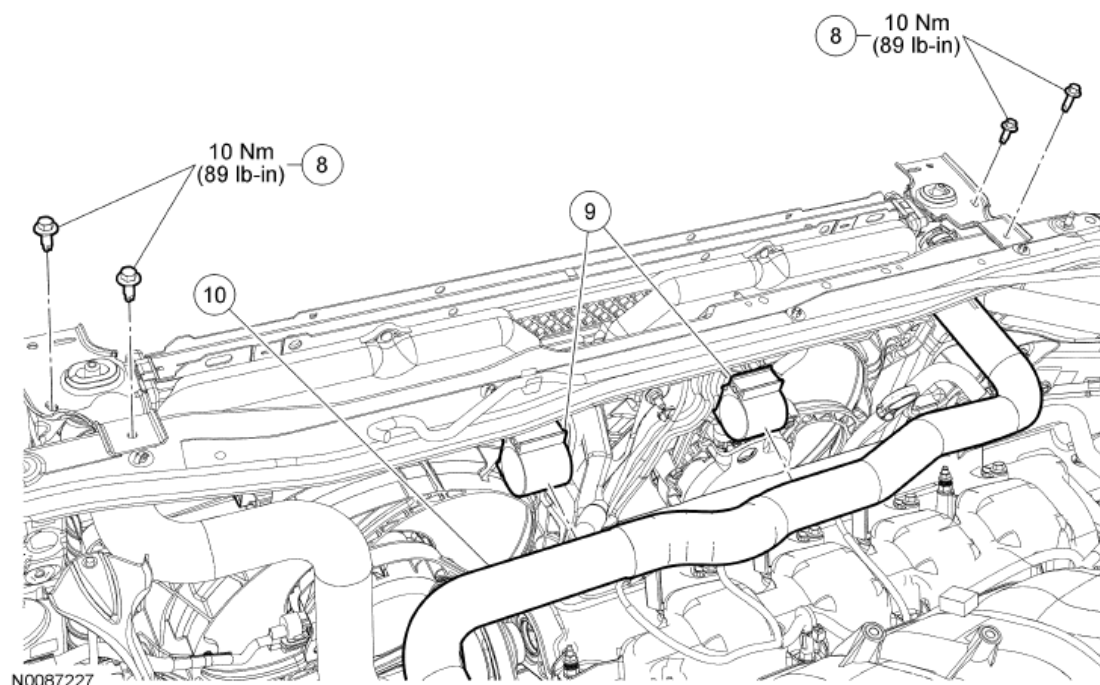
Identifying Upper Radiator Support Brackets With Bolts
